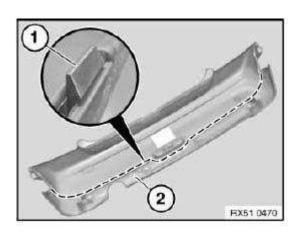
Identifying Catches And Spoiler Courtesy of BMW OF NORTH AMERICA, INC.
